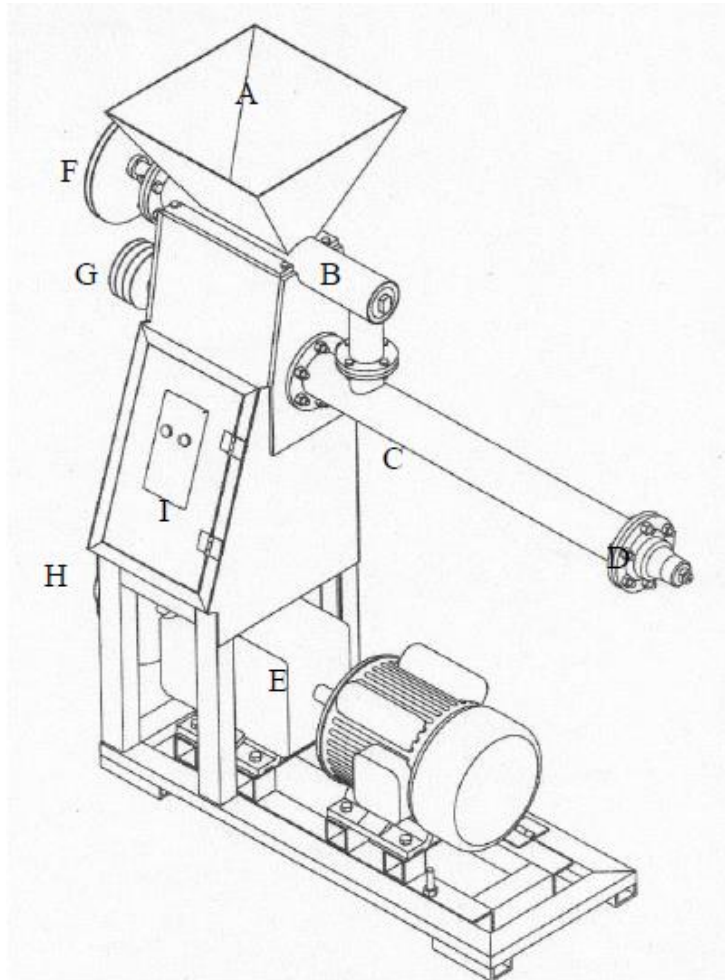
Isometric drawing of the extruder (LEGEND: A- Hopper, B- Feeding Conveyor, C- Extruder worm, D- Die Unit, E- Power train, F- Conveyor pulley, G- Extruder pulley, H- Extruder Housing, I- Control switch).
